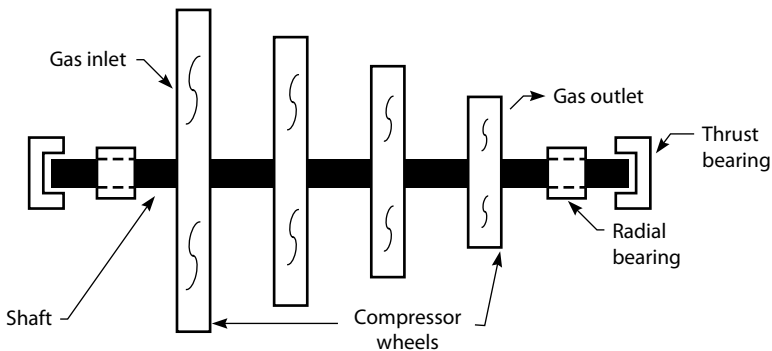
Rotating assembly for a centrifugal compressor.
